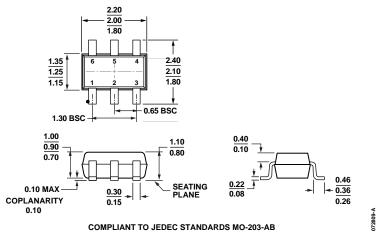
6-Lead Thin Shrink Small Outline Transistor Package [SC70] Dimensions shown in millimeters
